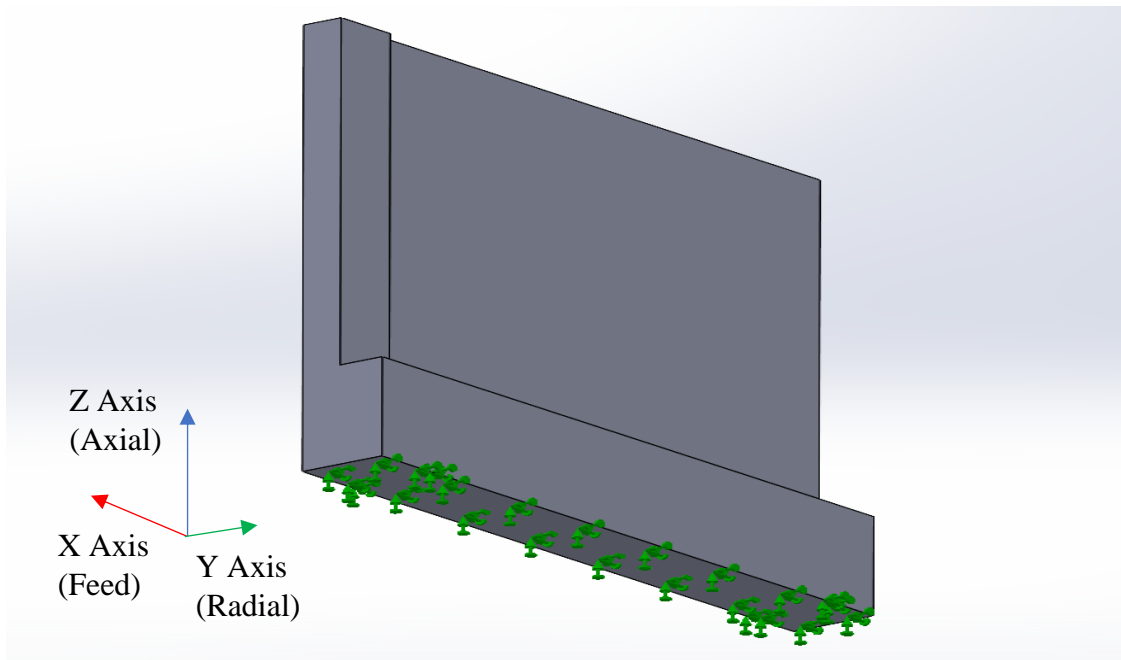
CAD model of 3 mm thick part with 6DOF fixturing constraints on bottom surface
